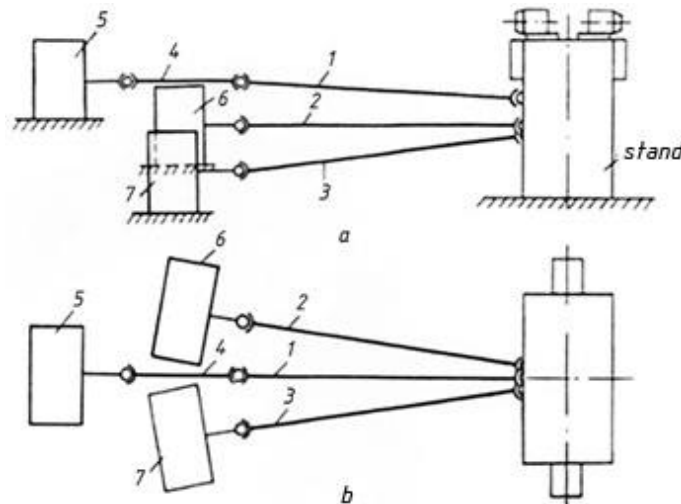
Scheme of the input side of the mill: a – main view; b – top view; 1-3 – main universal spindles; 4 – intermediate horizontal spindle; 5-7 – drive electric motors
